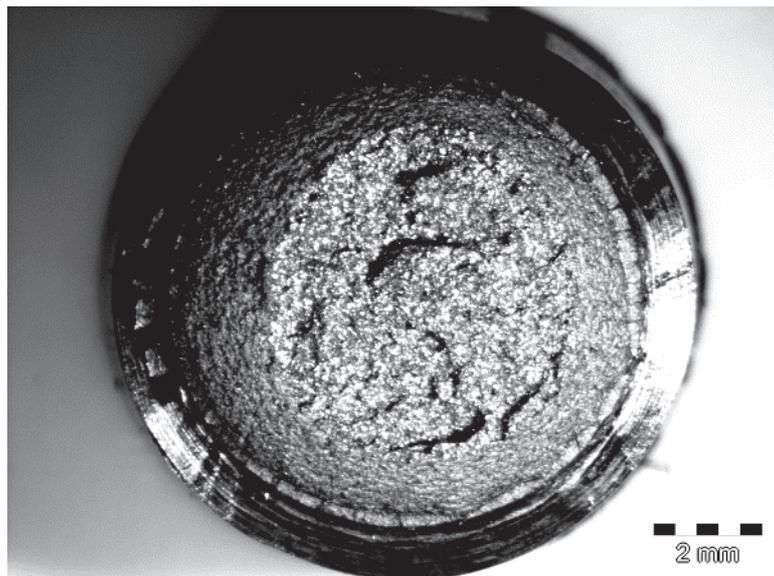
Pre-cracked fracture surface of S355 steel after tensile test
